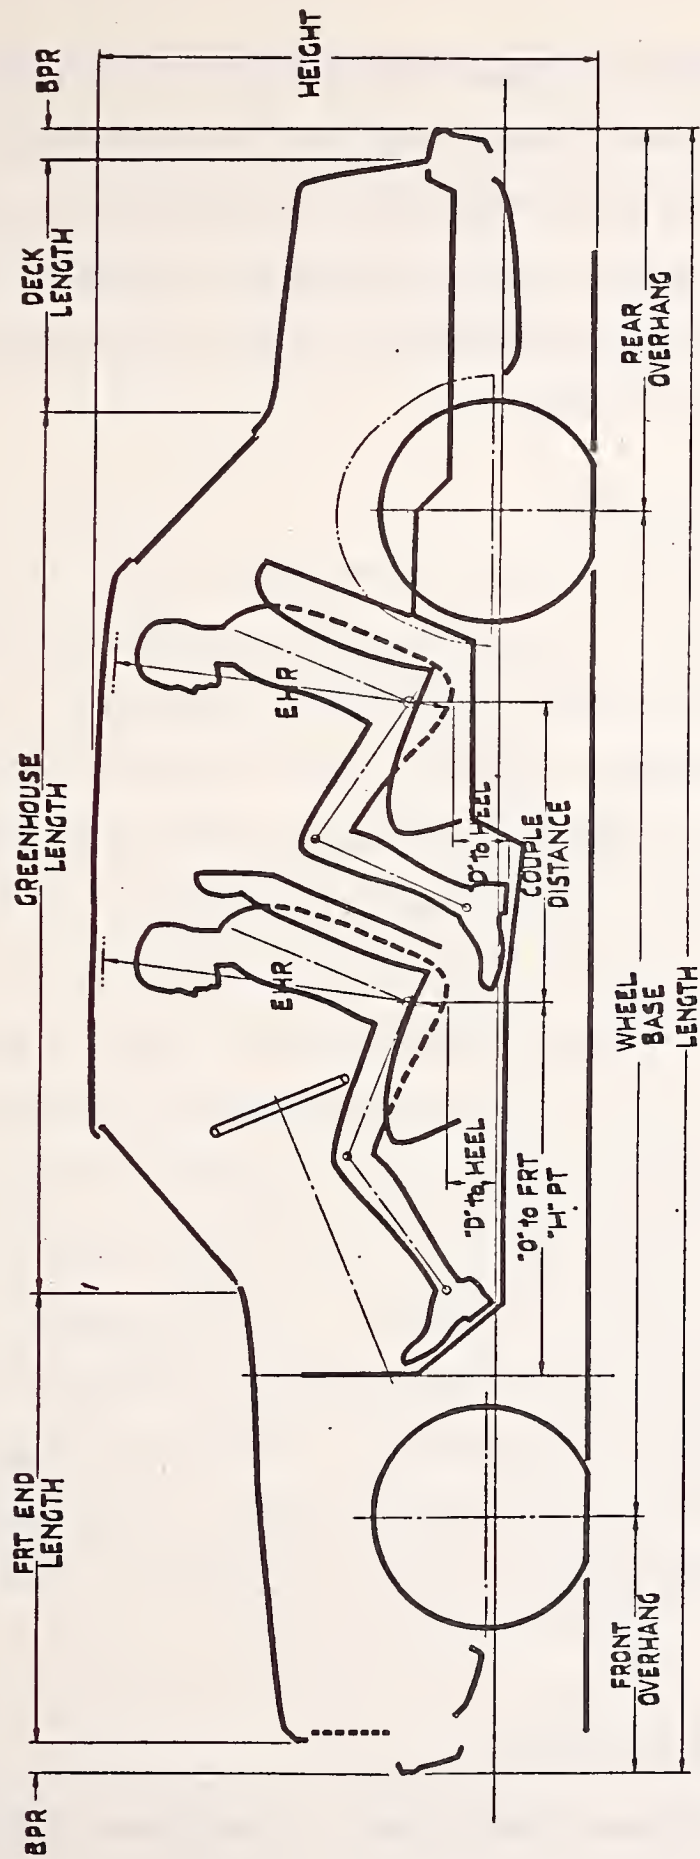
J. OPTIMUM FIVE PASSENGER PACKAGE
